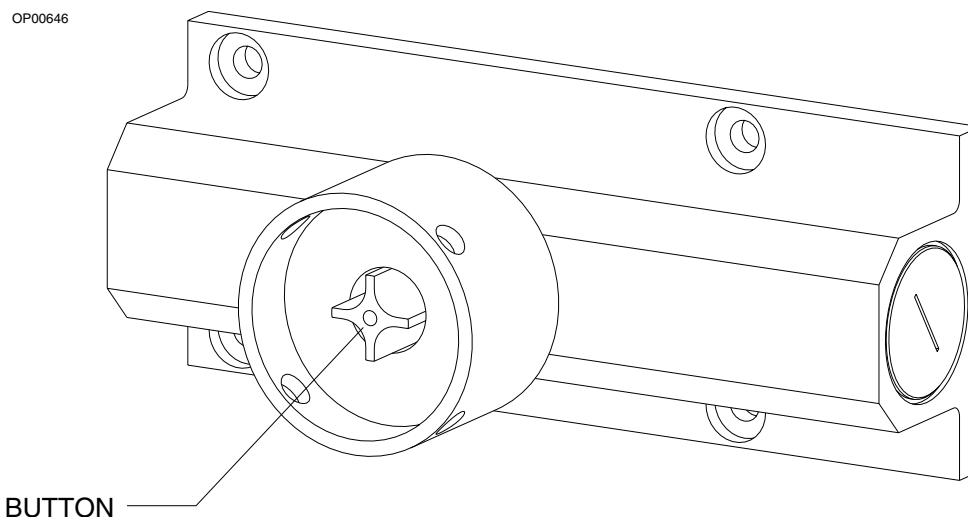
Gas Channel Block with Secondary Vacuum Relief Valve
